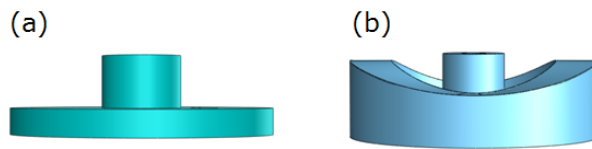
Crank wheel side view (a) Conventional crank wheel (b) Curved shape crank wheel.
